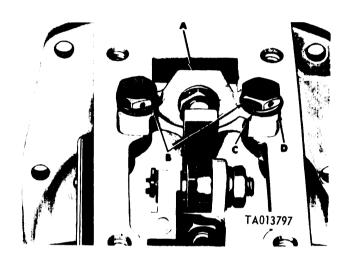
Installing plate and bridge assembly on governor housing (code G pumps).
